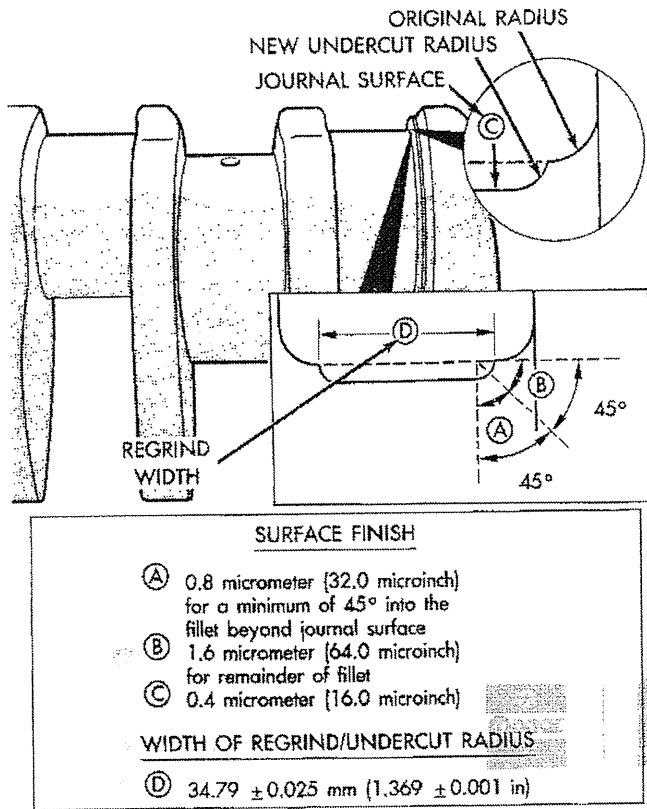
Crankshaft Rod Journal Grind—Preferred Method
